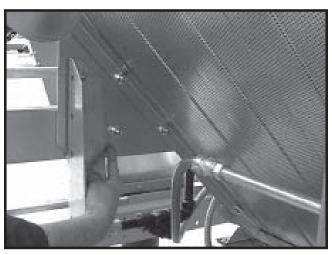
Rear view, adapted conduit access hole in gusset plate.
